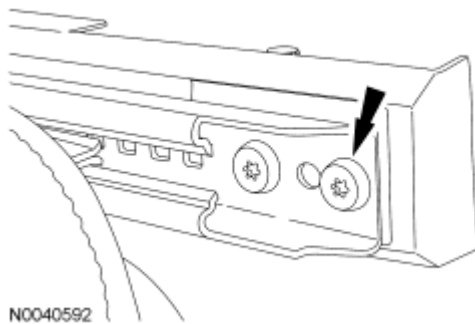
Locating OCS Rail Front Mounting Position Front Bolt
